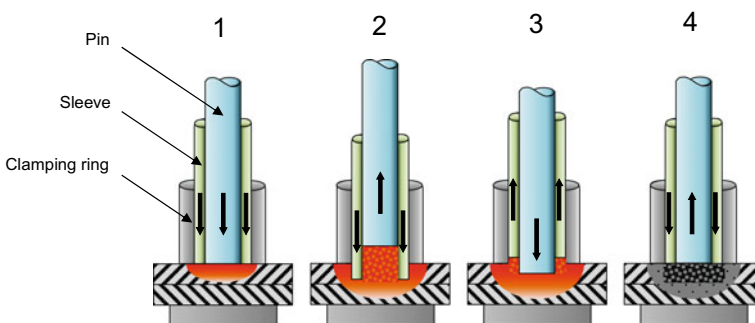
Schematic principle of the refill friction stir spot welding process
